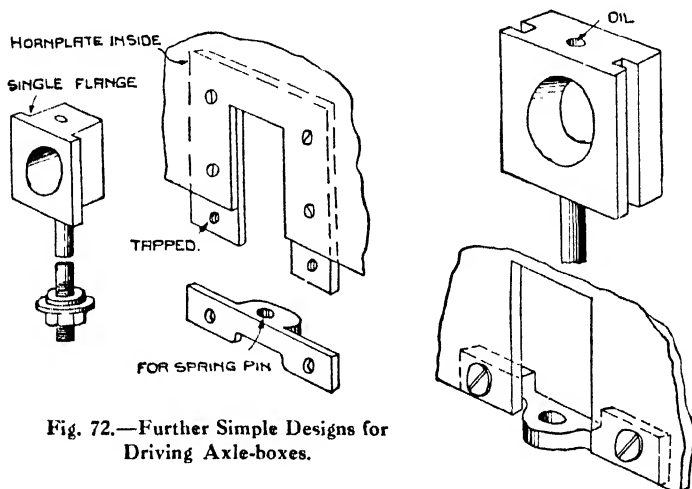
Further Simple Designs for Driving Axle-boxes.
